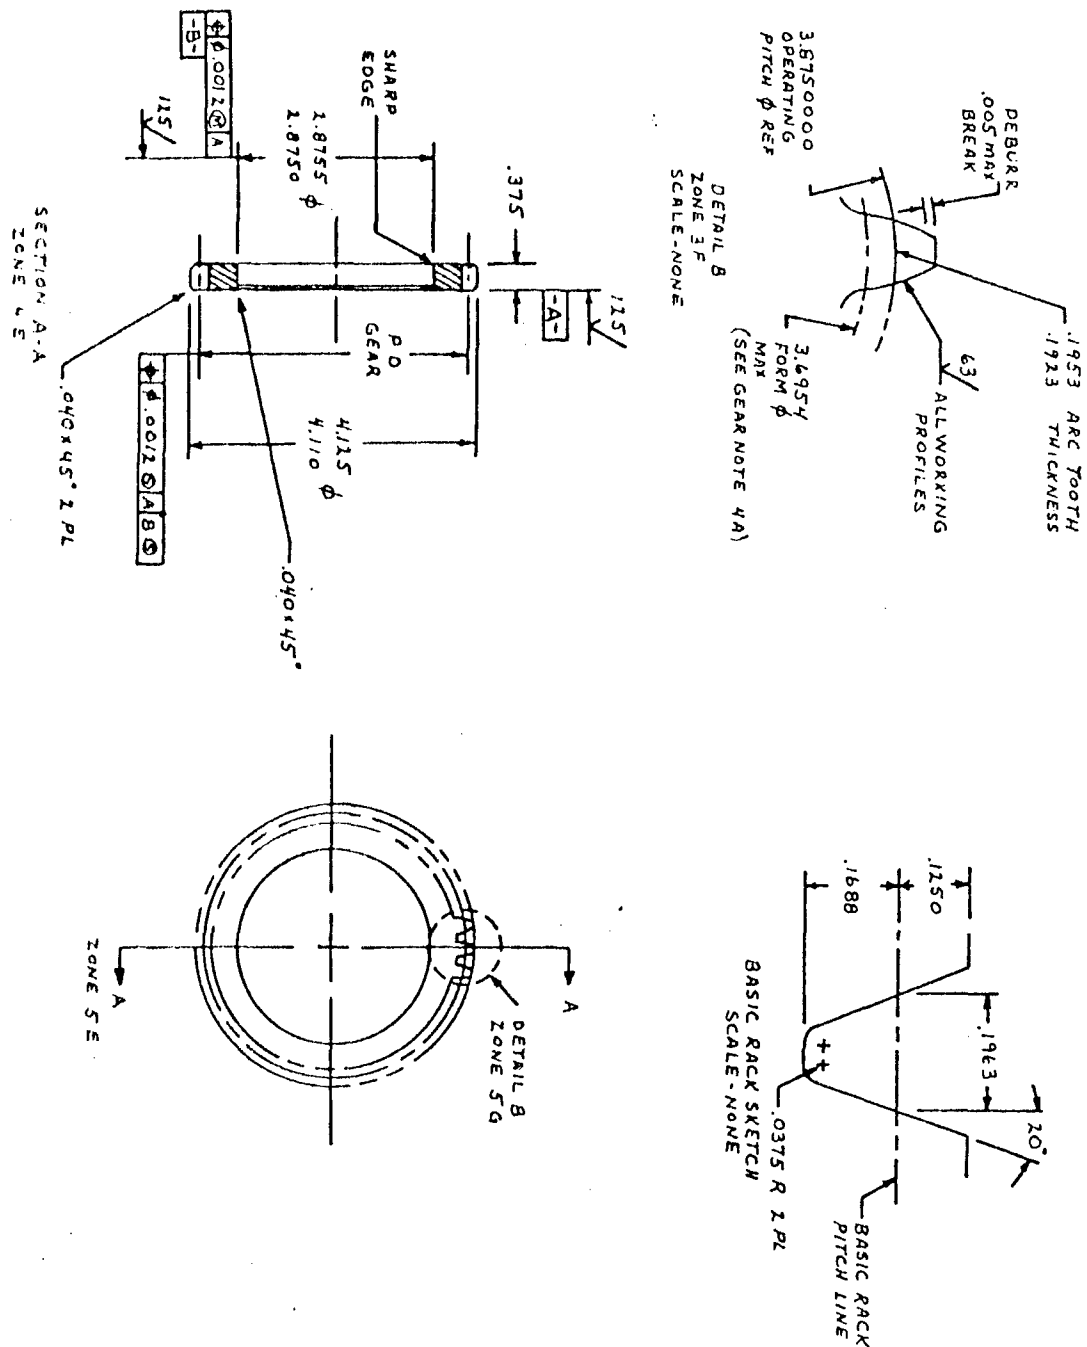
Pinion Gear for M-2 Personnel Carrier.
